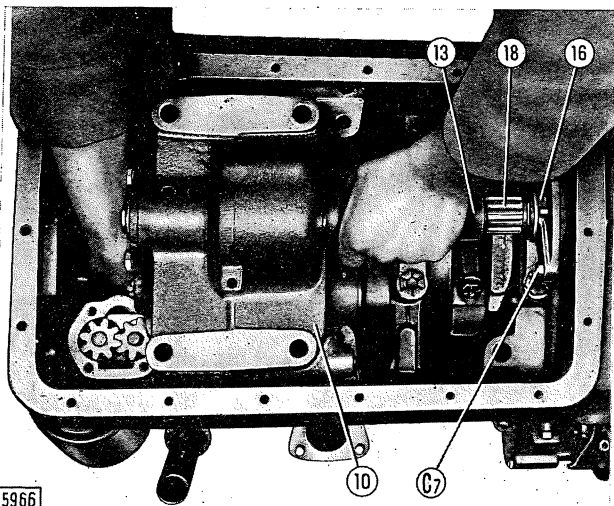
Removing the weights housing box (10) with sleeve coupling (13) installed.
